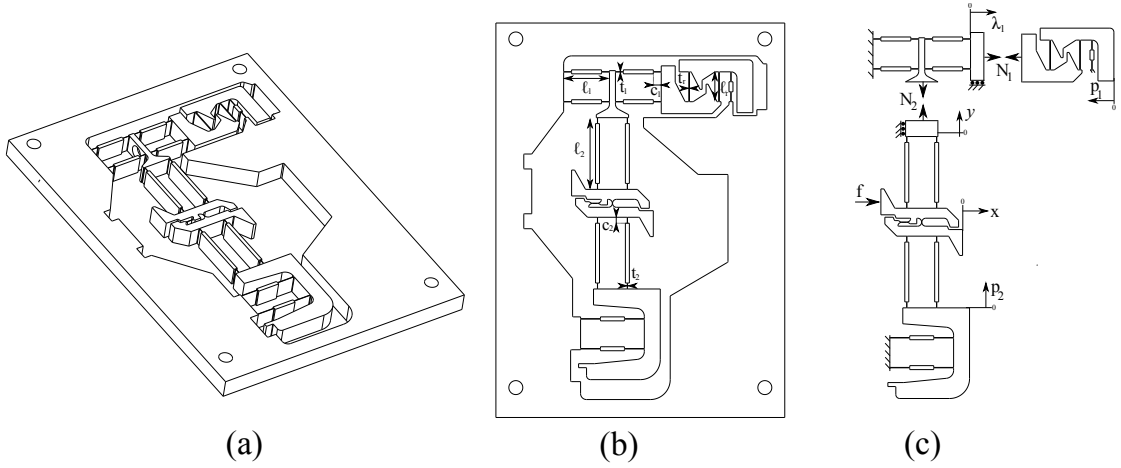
(a) T-shaped mechanism, (b) key dimensions, (c) forces and displacements.
